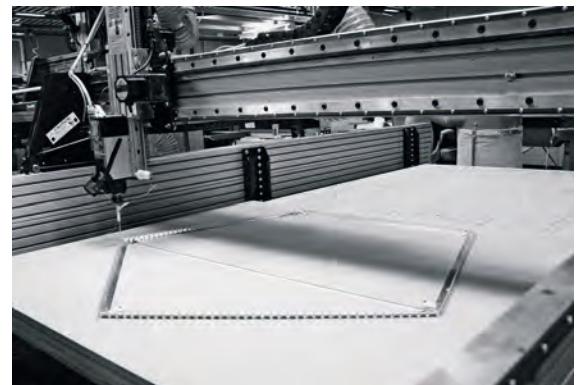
Three-axis CNC machine adapted as CNC deposition tool. Custom threading tool, temporary aluminium scaffolding and MDF jig.
